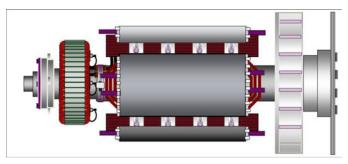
SINGLE BEARING ALTERNATOR ROTOR SHOWING COUPLING DISCS BOLTED TO DRIVE END COUPLING HUB AT RIGHT
